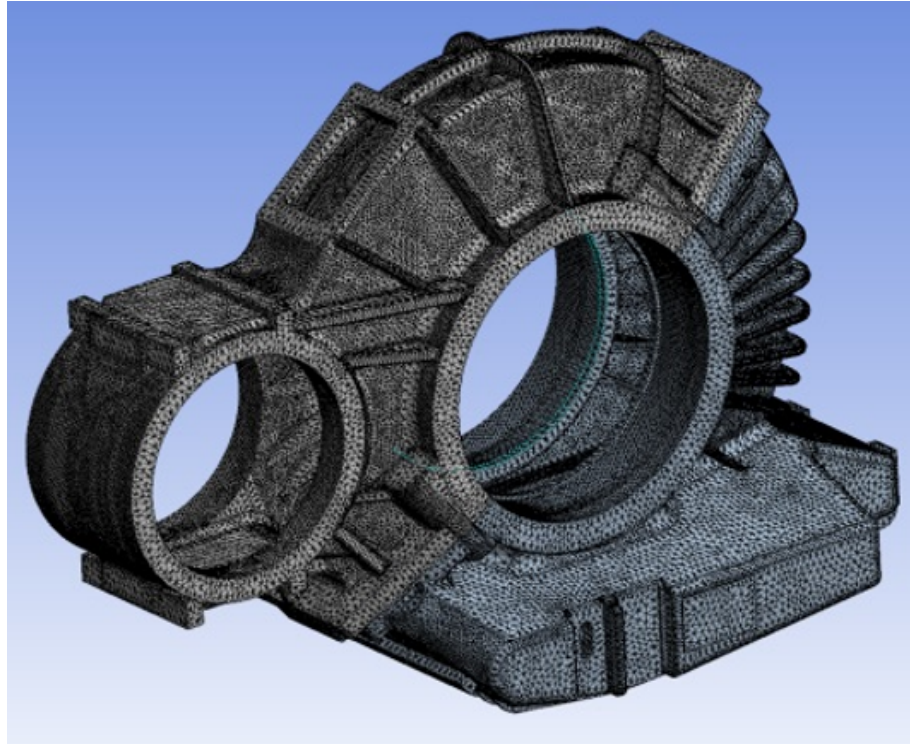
Gearbox [3], is a key component of the high-speed train transmission system, composed of gear pairs, box bodies, bearings, transmission shafts and other components.
